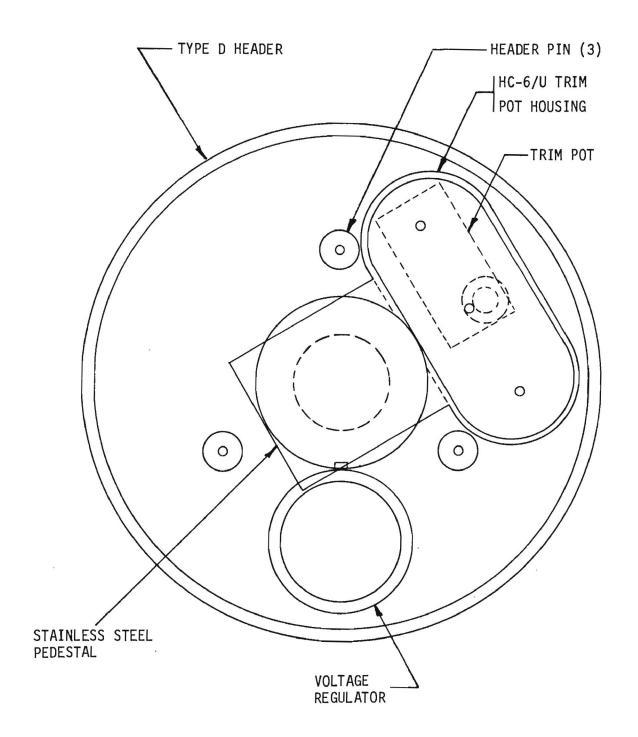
Conceptual design of tactical miniature crystal oscillator mounted in a type "D" cold-weld holder.
